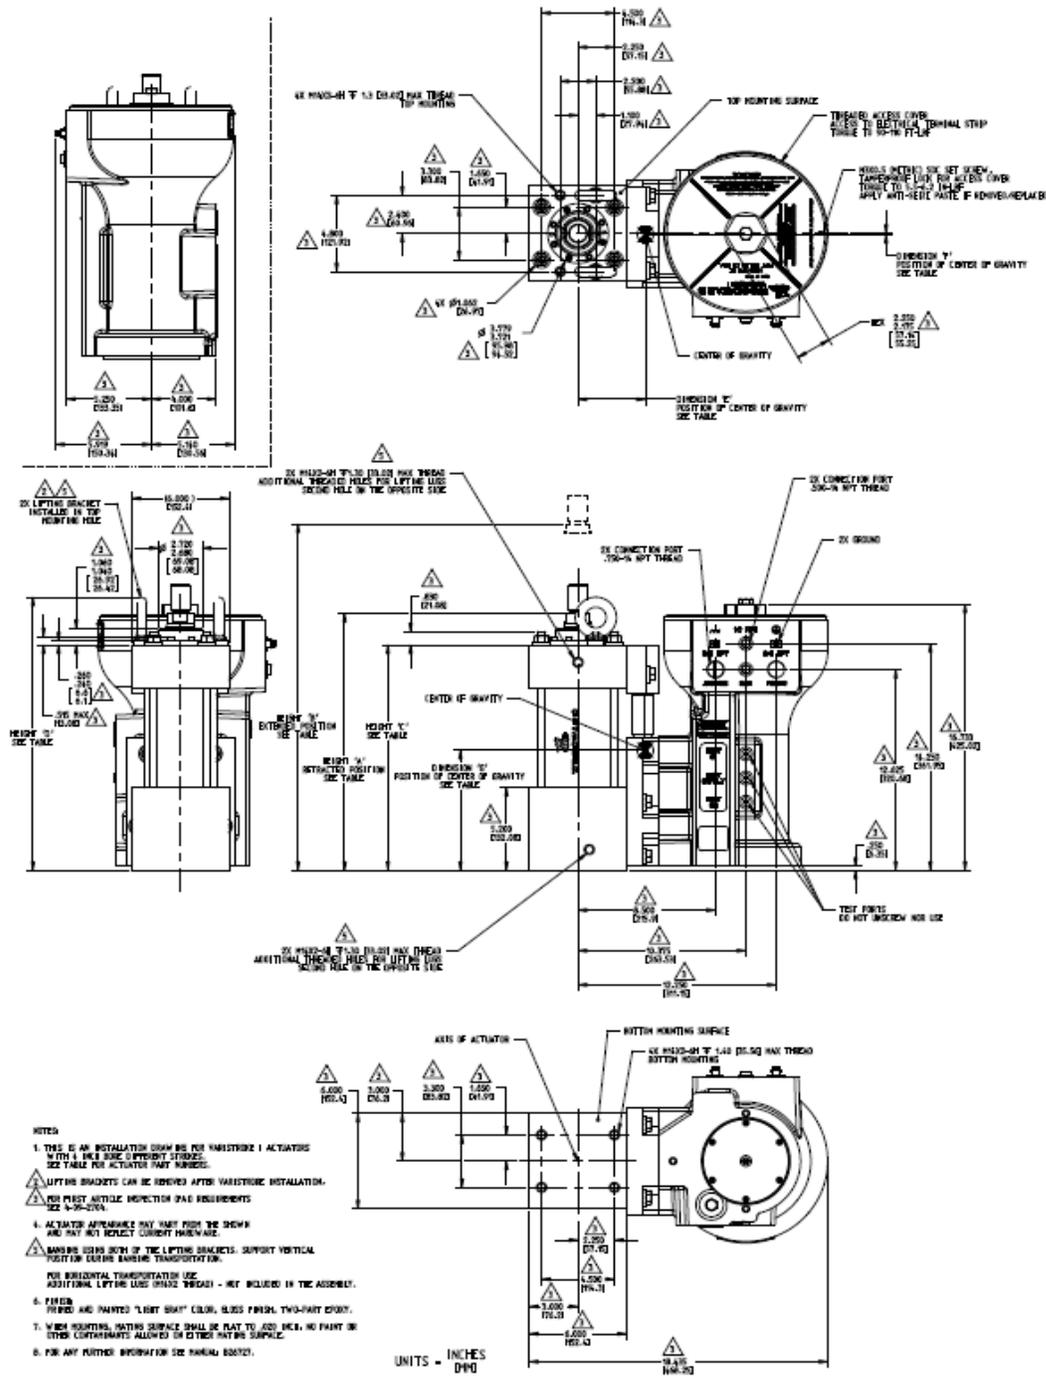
V25TD-10XX Integrated Installation Dimensions
